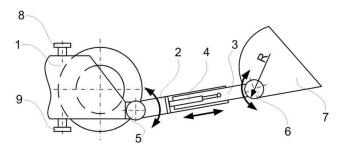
Diagram of the payload unit and front loader, especially for low underground mining excavations
